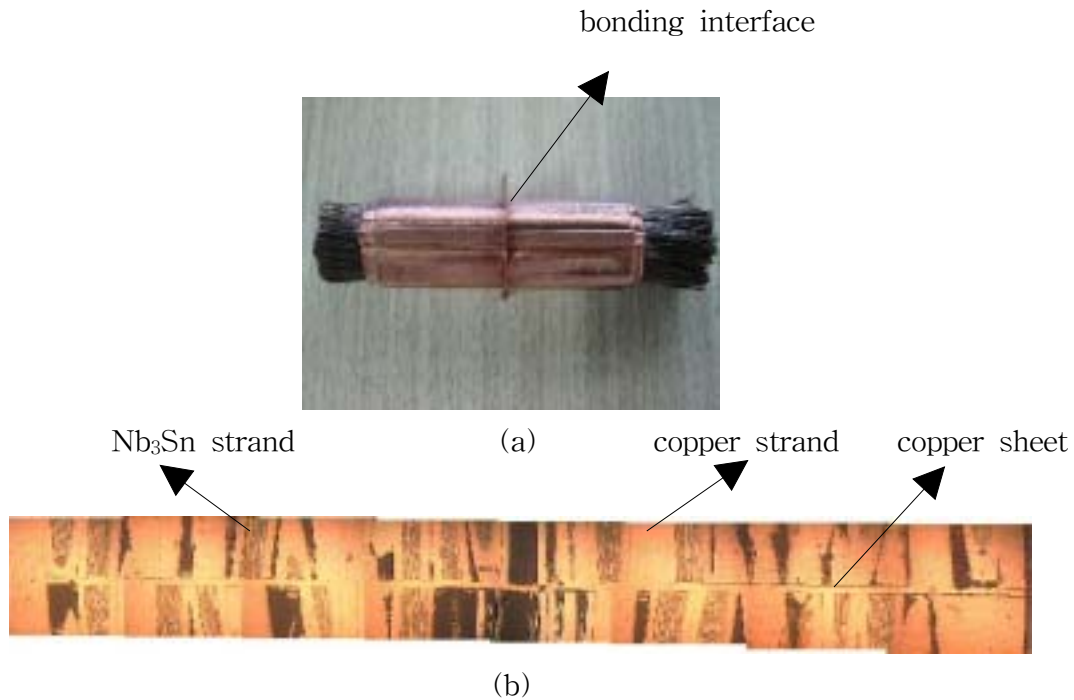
(a) Butt joined specimen, (b) cross-section of diffusion bonding
